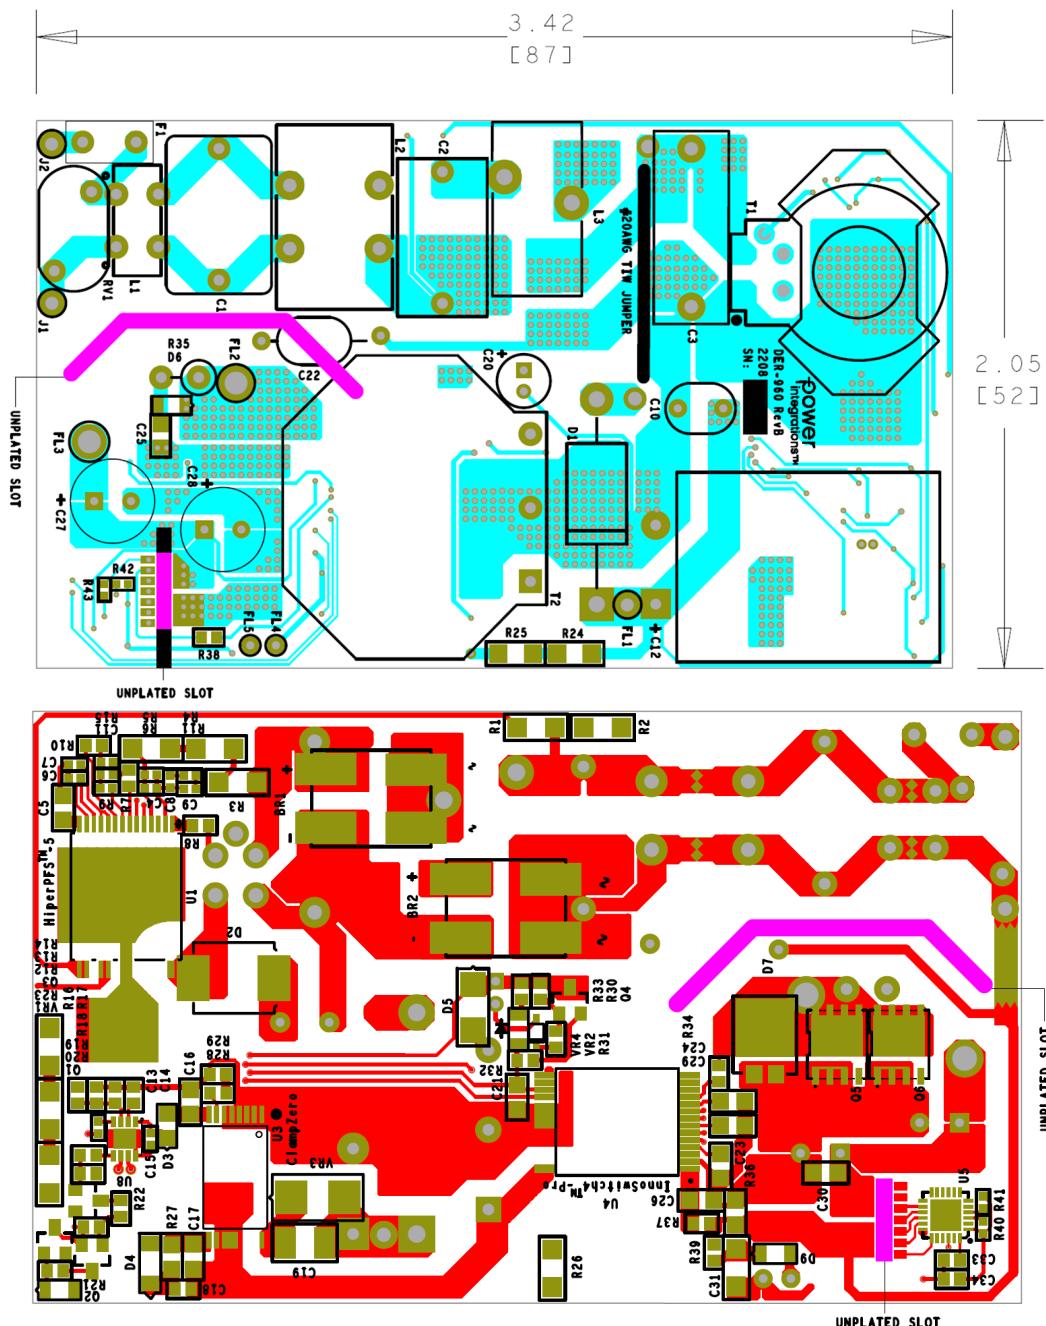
DER-960 Rev B Main Board PCB Layout, Top and Bottom.
